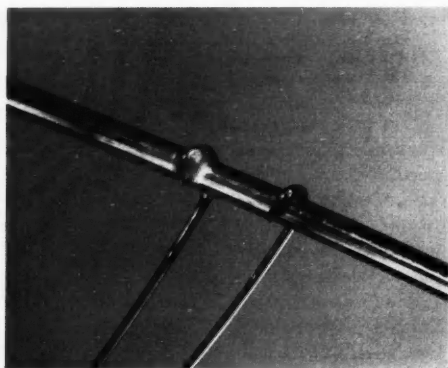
Soldering thin wire to thick. Right, fine wire clipped onto thick; left, the joint soldered.
